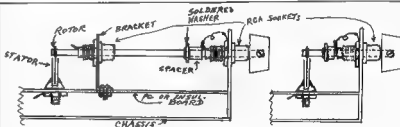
RCA Socket — Panel (screw mount) cat no P1430 — Dick Smith.
